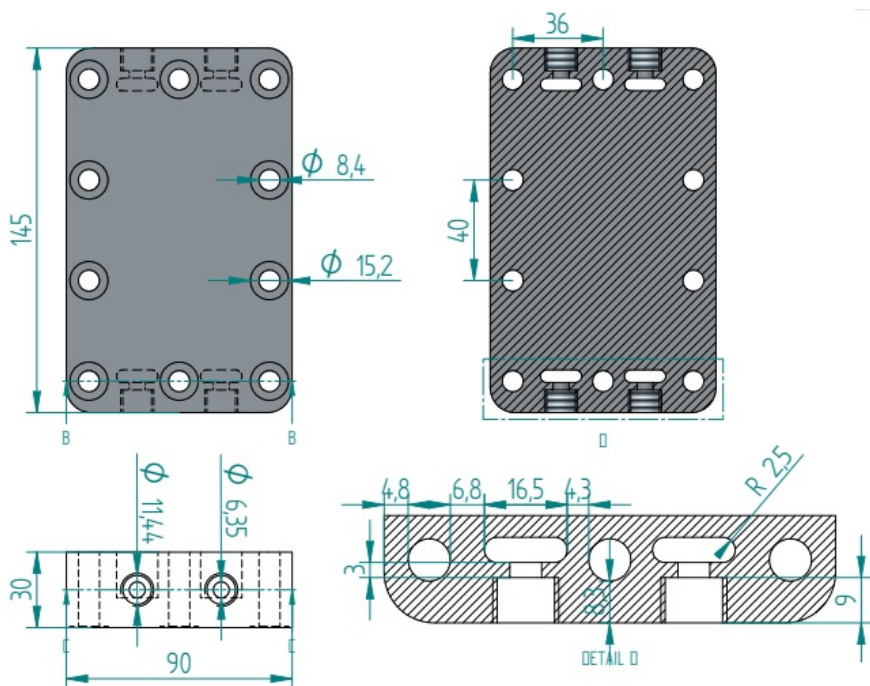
Dimensions of the final end plate design. Top figures: Top and bottom surface, respectively. Bottom left figure: Short surface and Swagelok coupling, Bottom right figure: Dimensions between bolt-, inlet and coupling holes.
